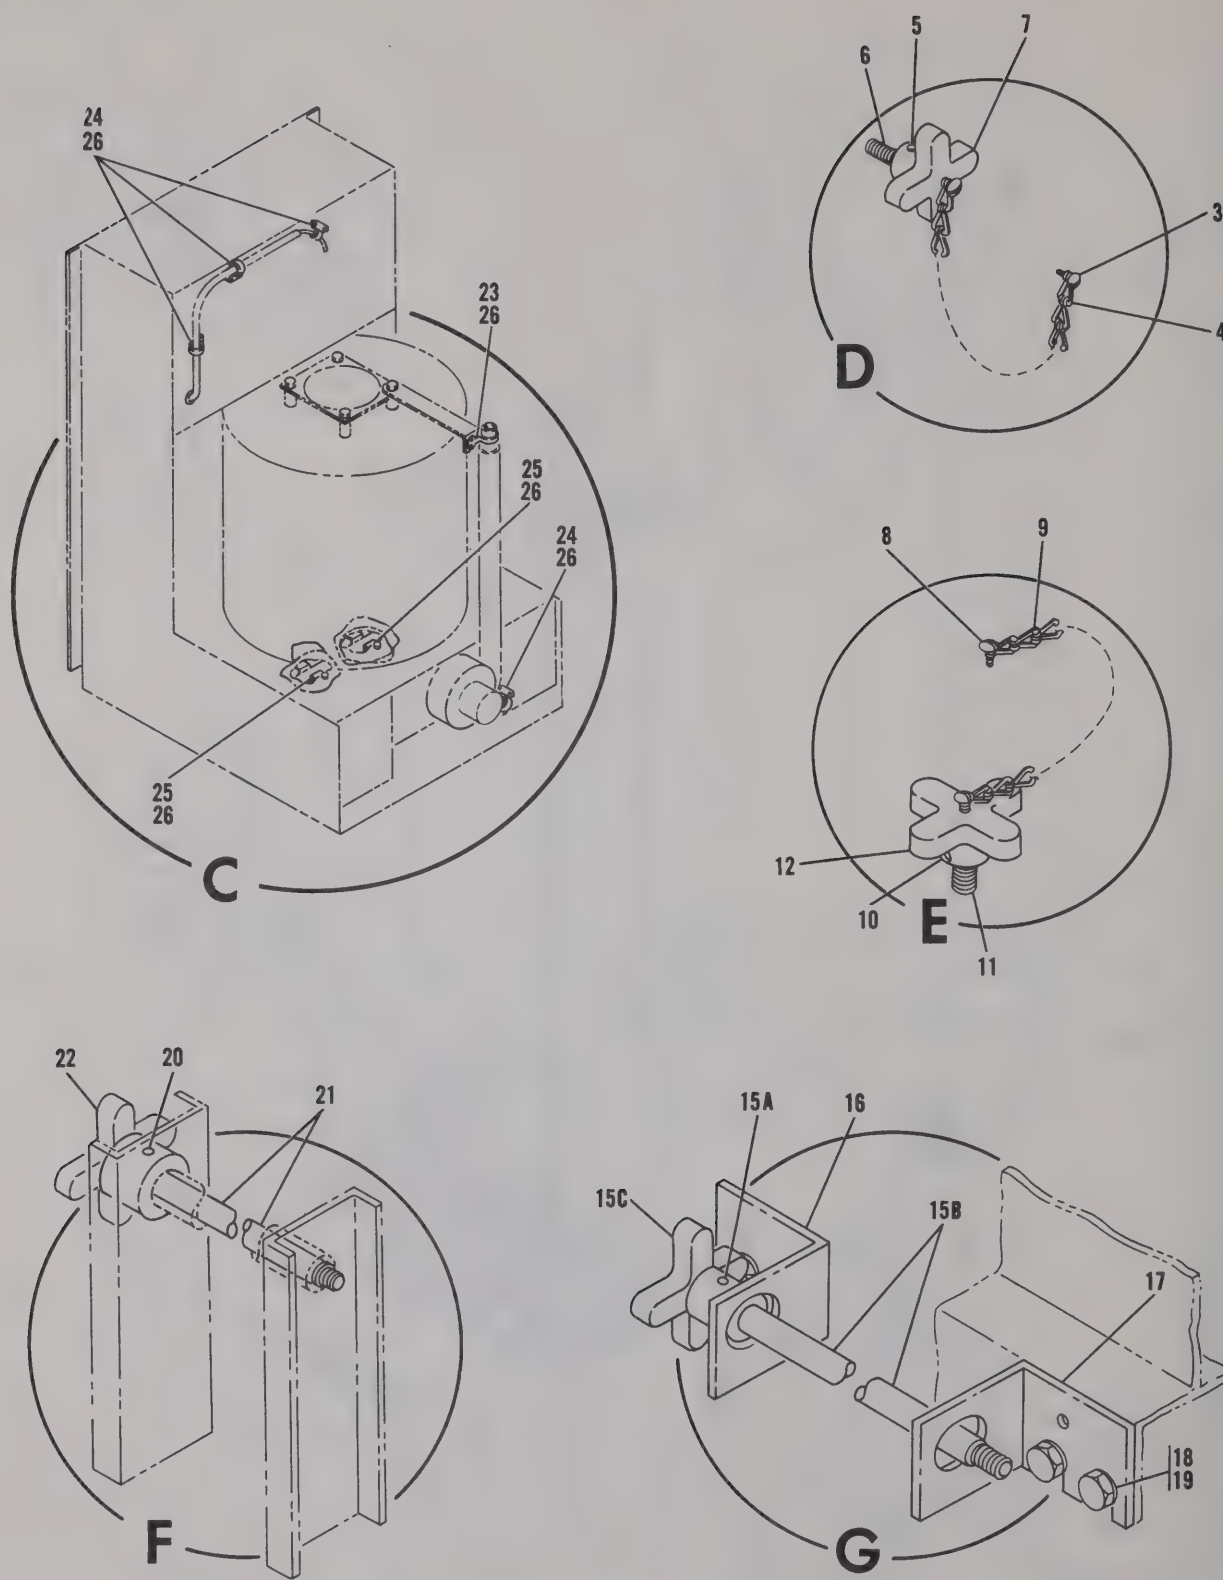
Assembly and Installation of Electrical Calorimeter
